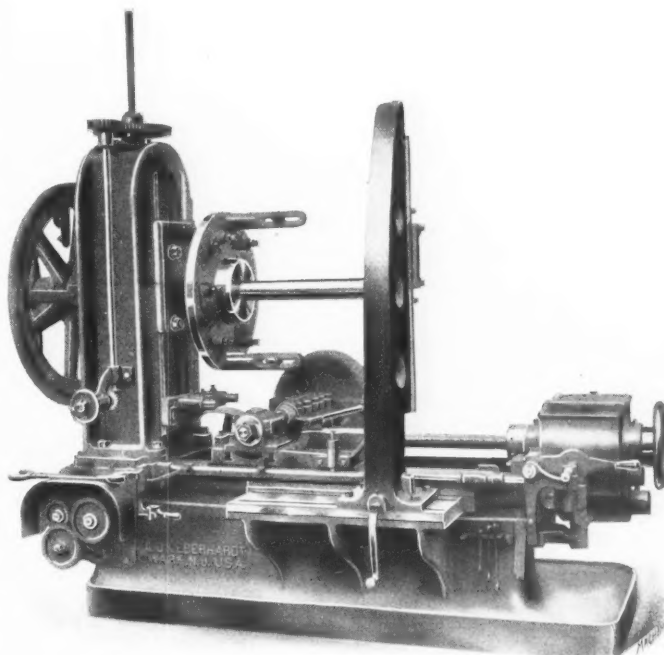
Specialized Design of the Gould & Eberhardt Automatic Gear-cutter for Heavy Motor Gear Work.
